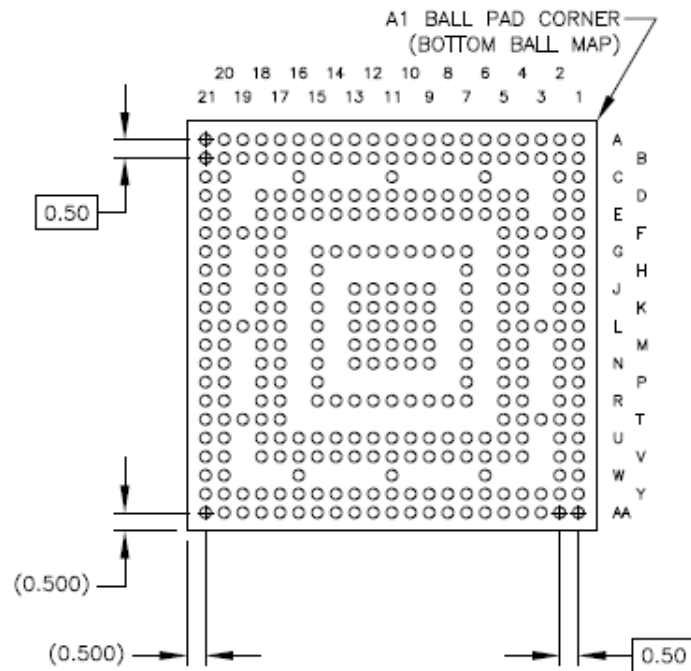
• MPF100T-FCSG325 Package Bottom-View
